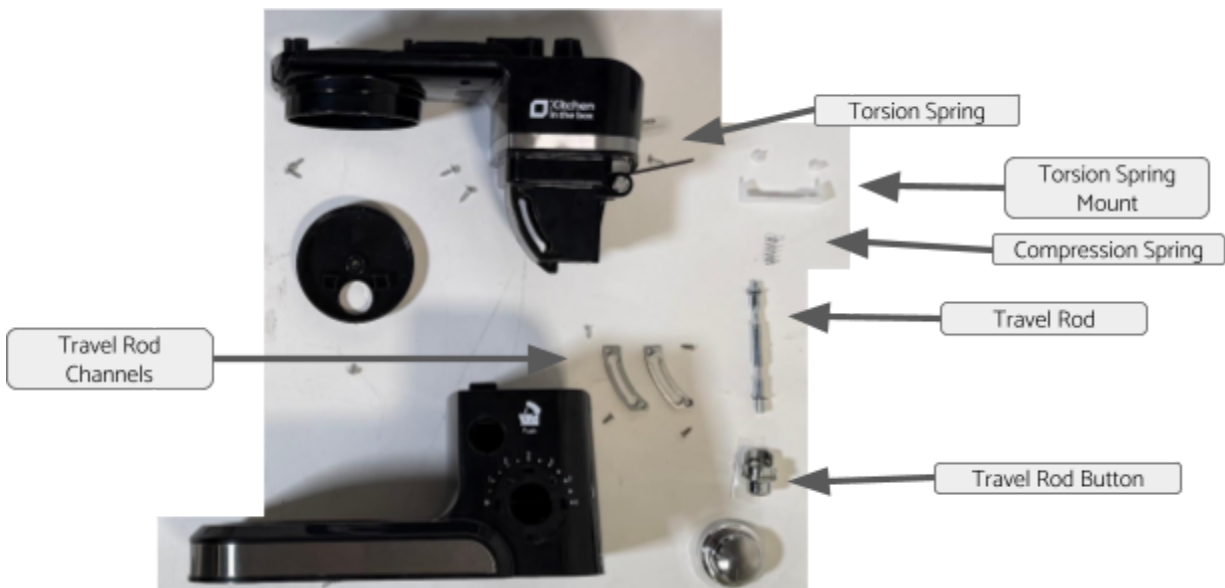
Disassembled hinge subsystem of the stand mixer showing the torsion spring, travel rod, compression spring, latch plates, and push button.
